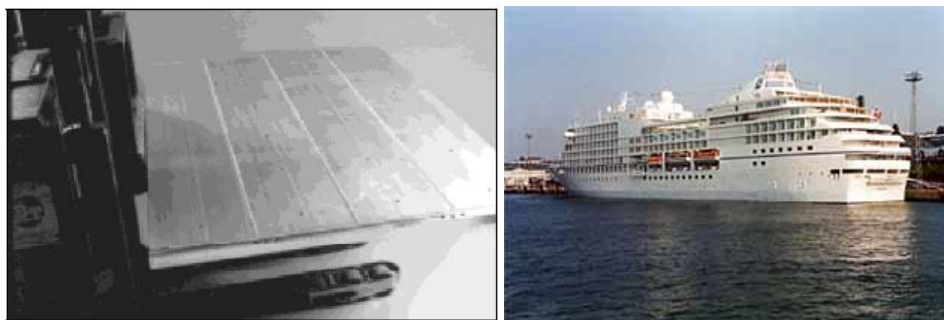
a) Sapa FSW aluminum panel for pressing of fish blocks before quick freezing. The panel is welded from both sides (Nicholas & Kallee, 2002), b) 'Seven Seas Navigator', a cruise ship with extensive friction stir welding in the superstructure (Johnson & Threadgill, 2003).
